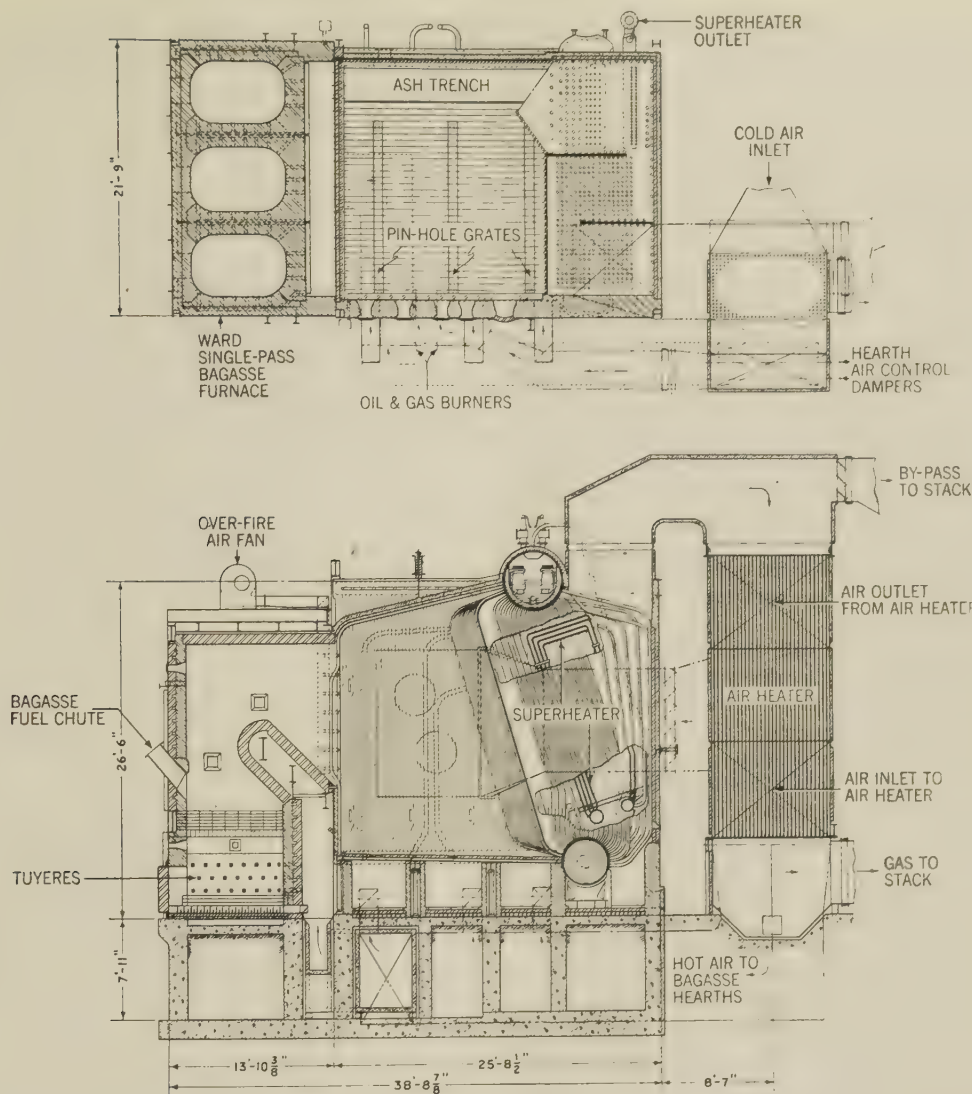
ARRANGEMENT FOR BURNING BAGASSE IN WARD FURNACES ATTACHED TO INTEGRAL-FURNACE BOILER
